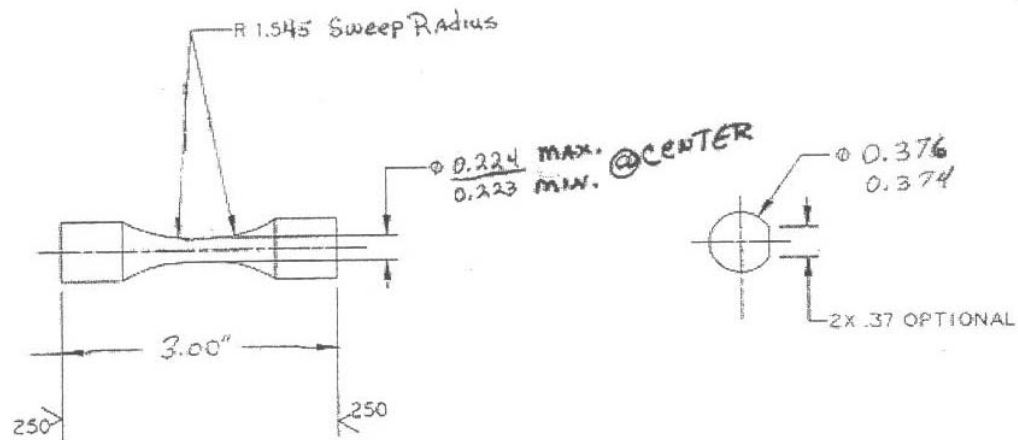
Engineering drawing of the cylindrical fatigue specimens
